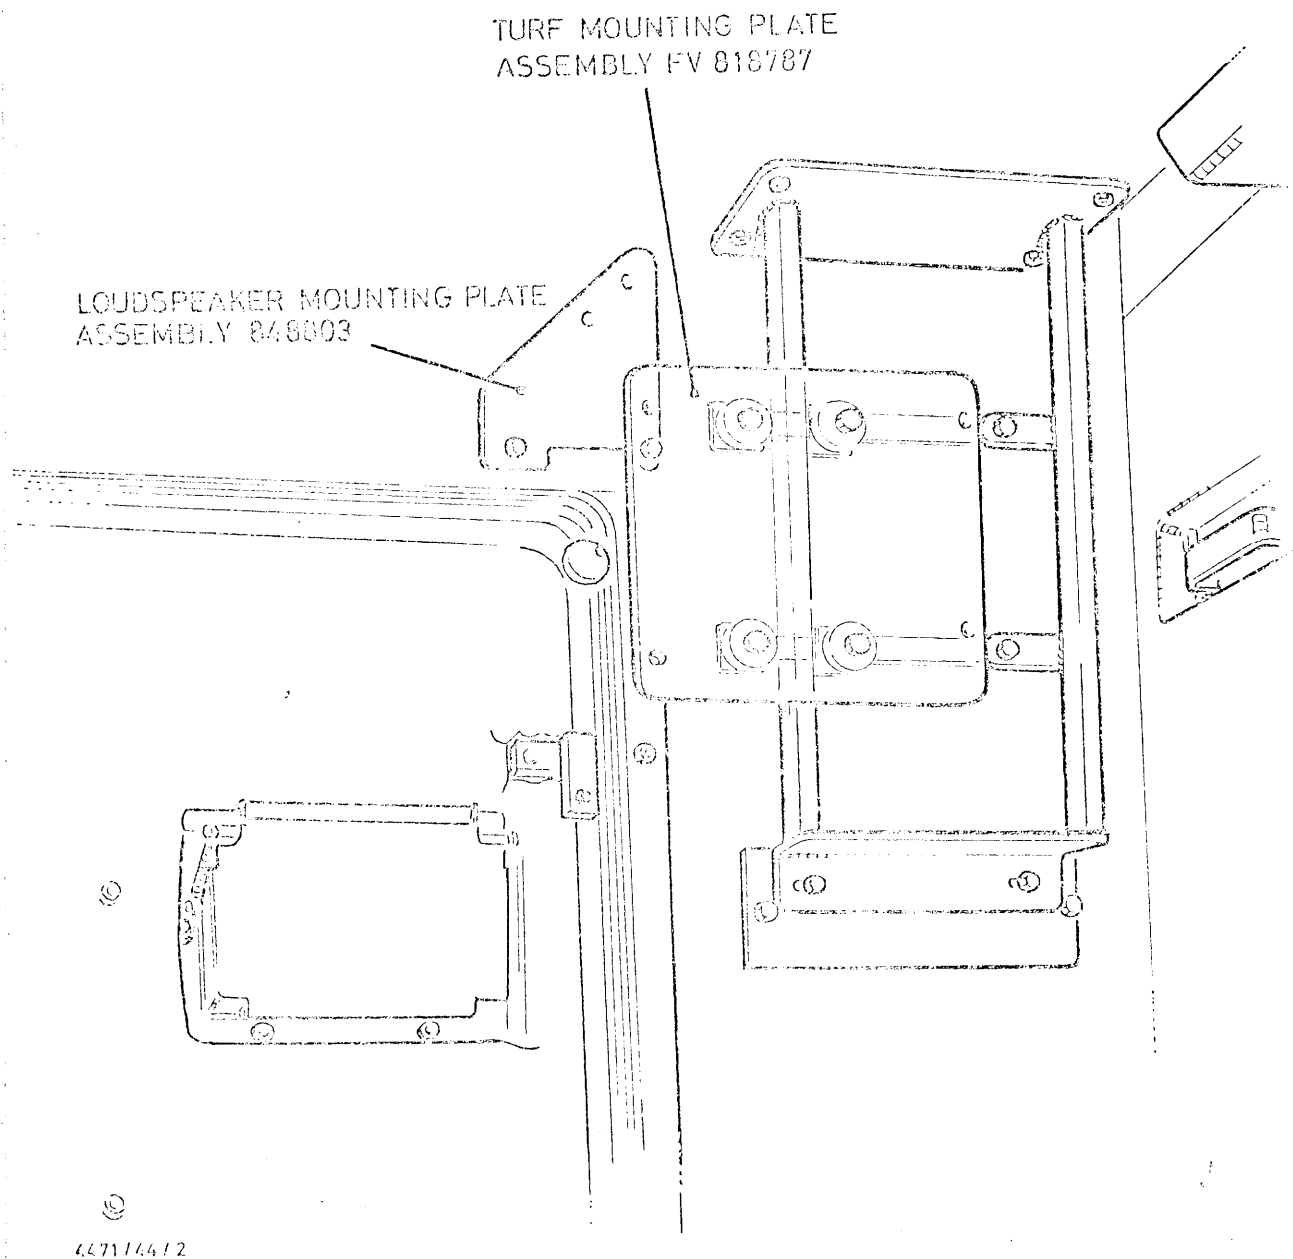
View of rear wall with loudspeaker mounting plate assembly and TURF mounting plate assembly installed
